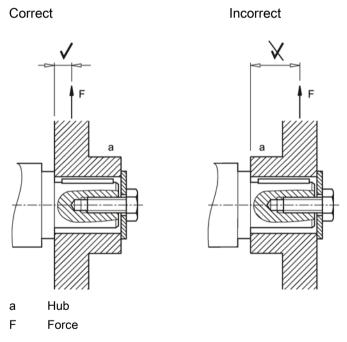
Mounting arrangement for low stress on shafts and bearings
